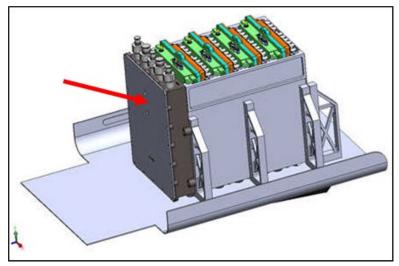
MAIM Installed on Jump-20 MP Payload Tray
